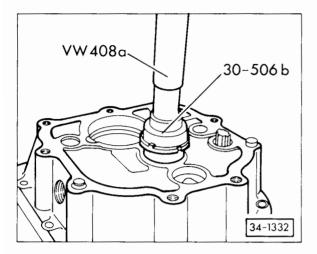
Pressing outer race/needle bearing into bearing carrier
